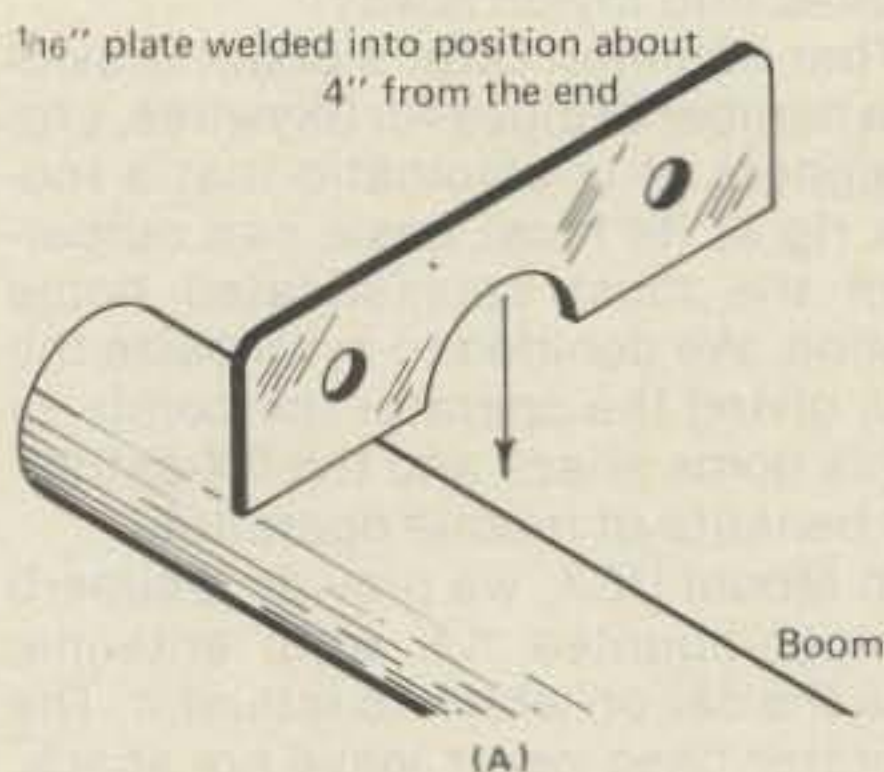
A  $\frac{1}{16}$ " bracket is welded to the boom. This predrilled bracket is screwed to the spreader bracket which has been drilled and tapped.
